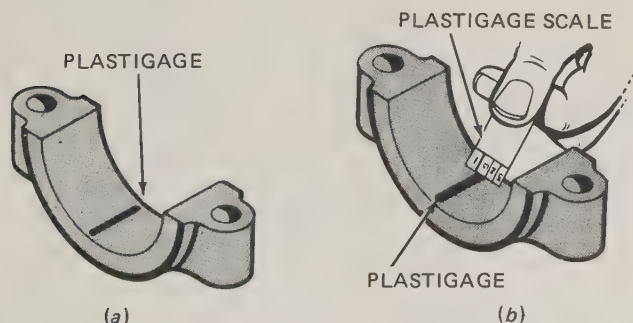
Using Plastigage to check bearing clearance. (a) Lay a strip of Plastigage on the bearing in the rod cap. (b) After installing the cap and then removing it, measure the amount that the Plastigage has flattened to determine clearance.
